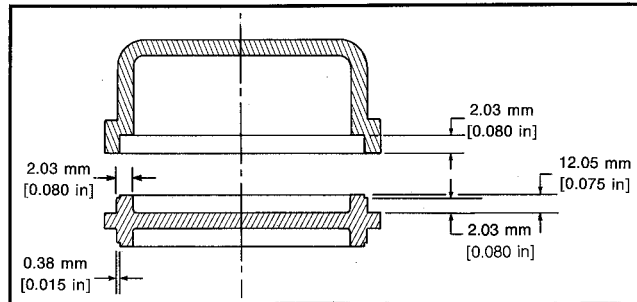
An automotive valve component designed for ultrasonic assembly using Du Pont Hytrel polyester thermoplastic elastomer.
